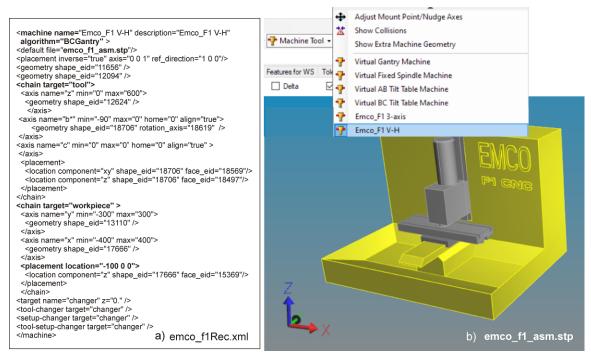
Example of XML (a) and STP (b) representation of CNC woodworking machine EMCO F1 CNC for machine simulation in STEP-NC Machine environment
